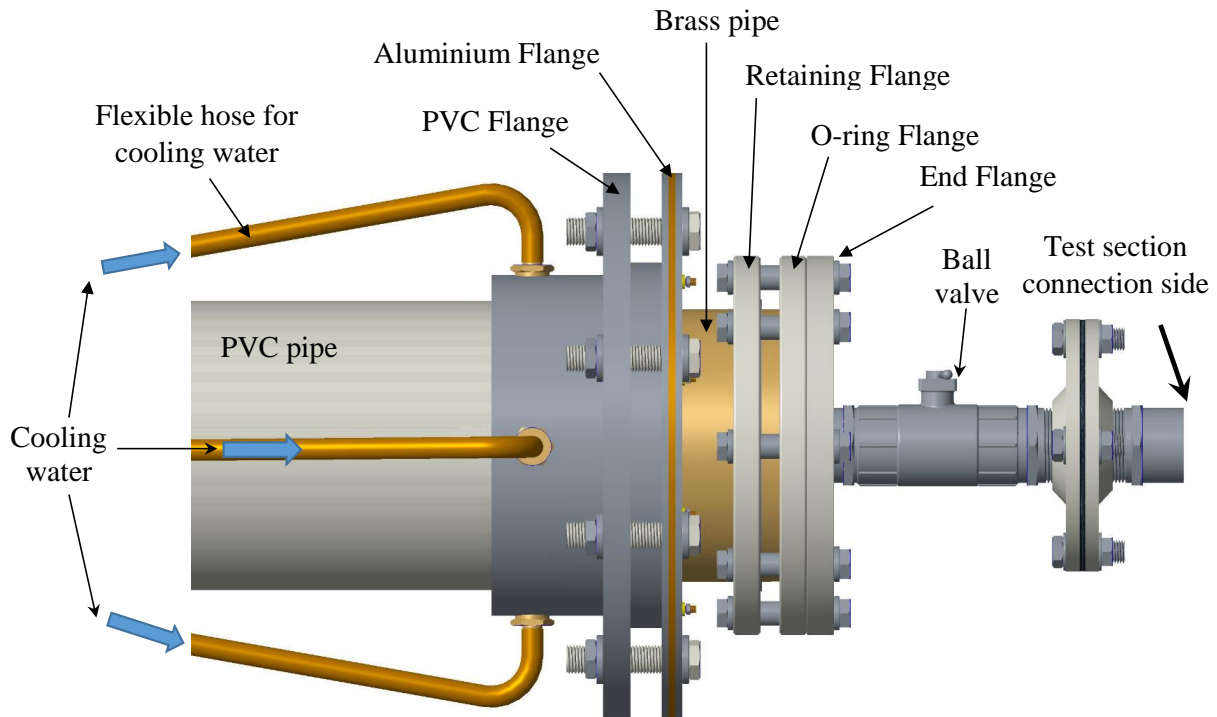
Details of the flange combination connection to hold and seal the PVC and brass pipes (test section connection side).
